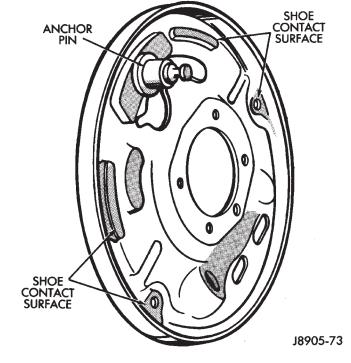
Shoe Contact Surfaces (10-Inch Support Plate)
